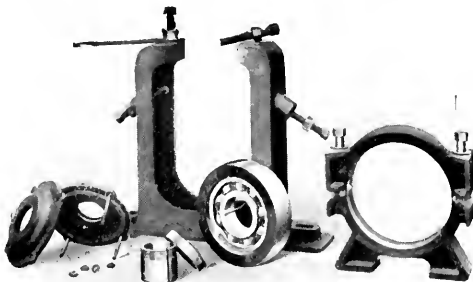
Component Parts of the Bright Ball Bearing Hanger
